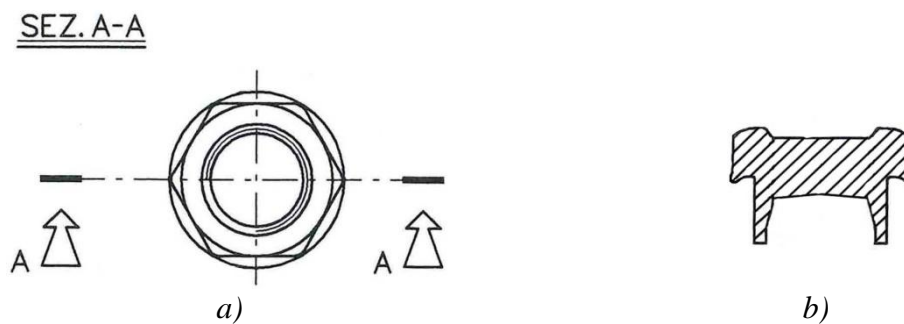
a) Top view of the hex-head plug fitting CAD geometry and b) side view showing the investigated zone.
